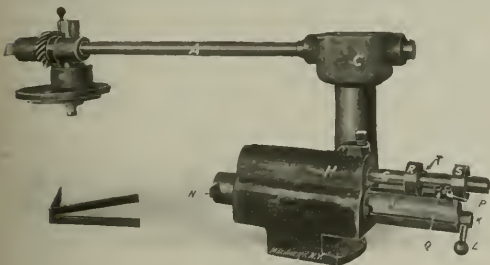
Chasing Attachment for the Flat Turret Lathe.
